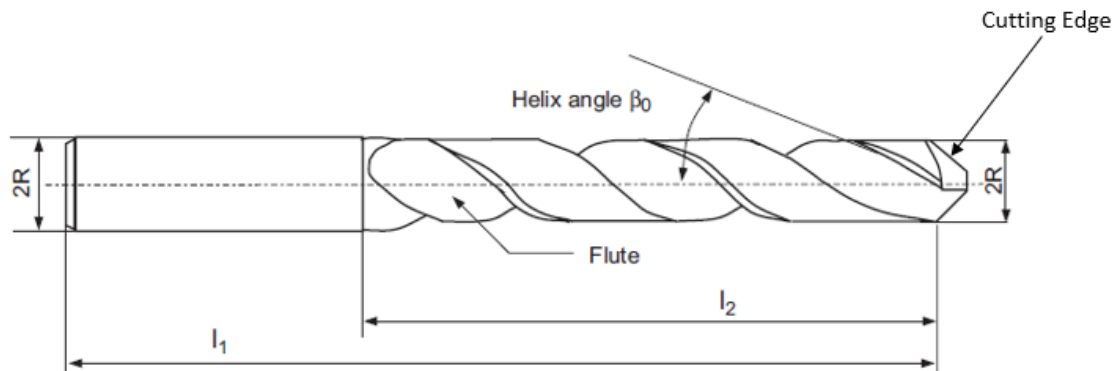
Twist drill geometry. (Altintas, Manufacturing Automation: Metal Cutting Mechanics, Machine Tool Vibrations, and CNC Design, 2012)
